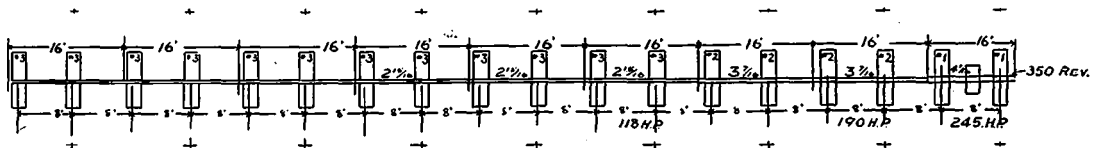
LINE SHAFT PLAN, SHOWING LOCATION OF PIERS AND THE VARYING DIAMETER OF THE SHAFT TO PROVIDE FOR THE POWER REQUIRED FOR THE HEAVIER MACHINERY.
